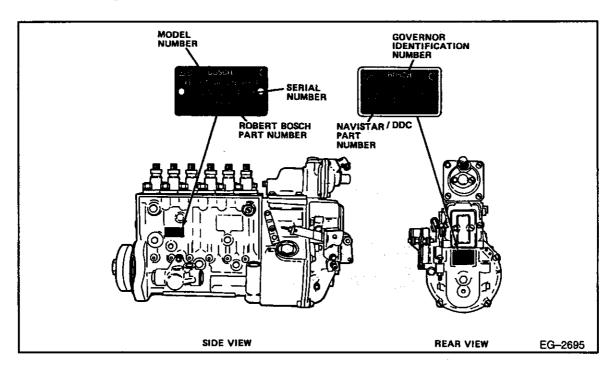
The Injection Pump Housing I.D. Plate and the Governor I.D. Plate
